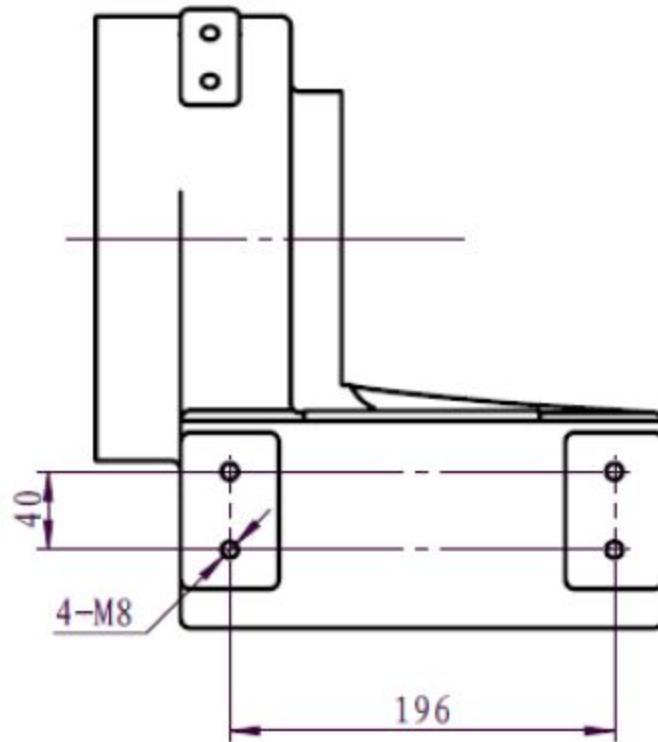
Forearm Auxiliary Mounting Hole Dimensions of SR50
